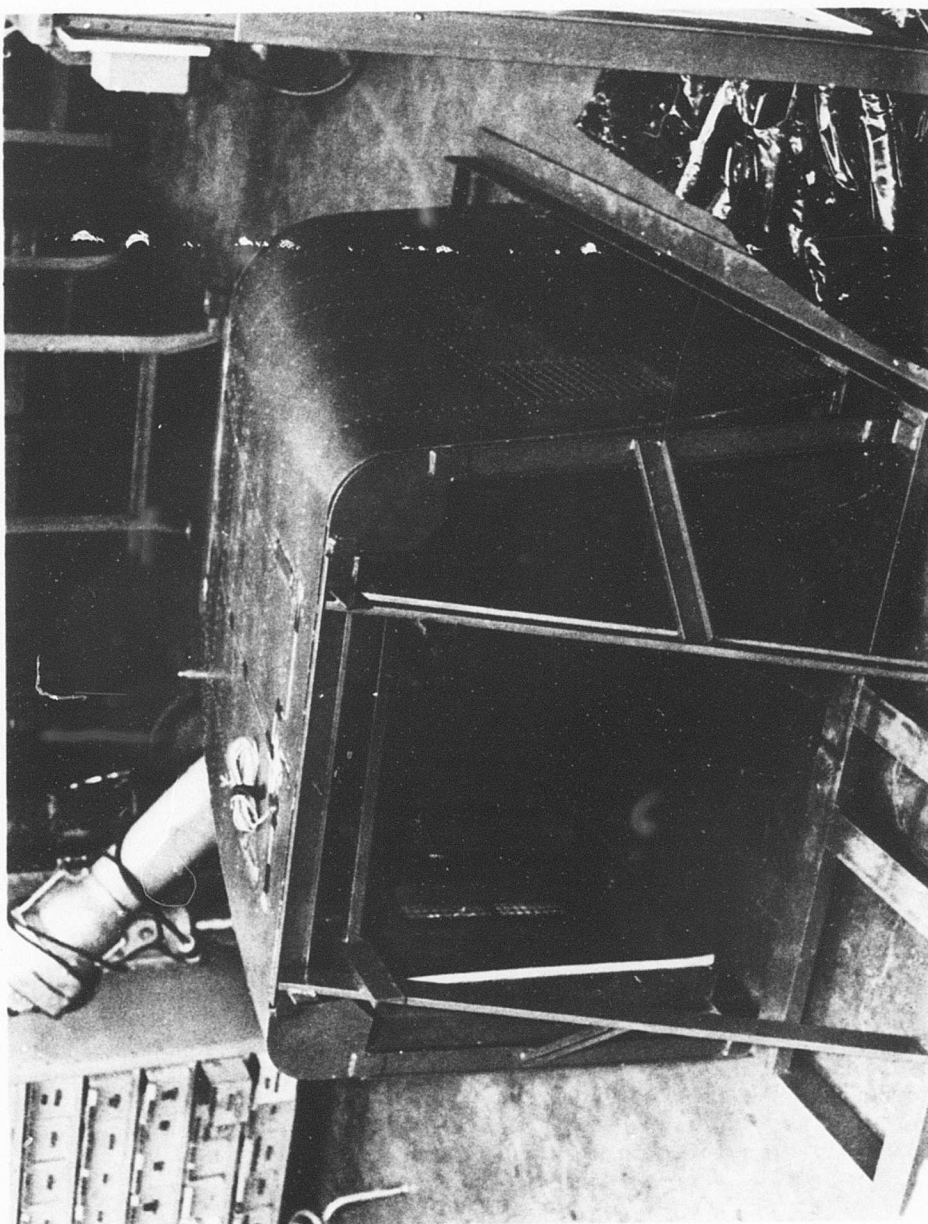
Main Rotor Pylon, Hinged Cover Assembly.
